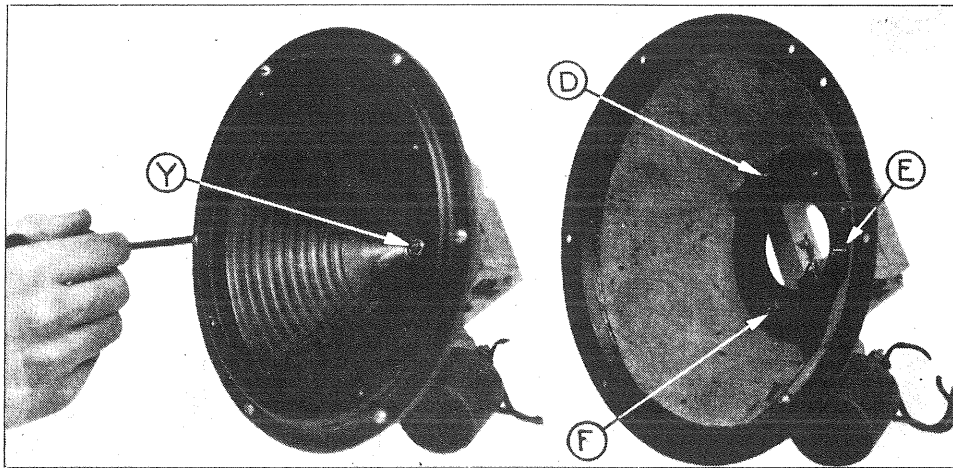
Cone, showing six mounting screws around edge and lock nut (Y) and motor mechanism mounting screw nuts D, E, F
